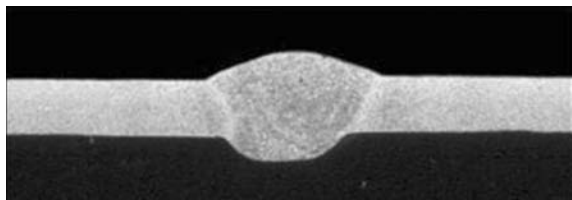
Macrosection of welded joint of D16 alloy 2 mm thick produced by PAW in downhand position
